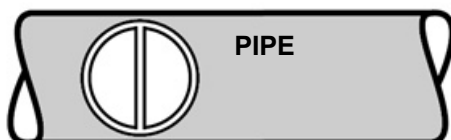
Proper alignment of thickness transducer on cylindrical surfaces
